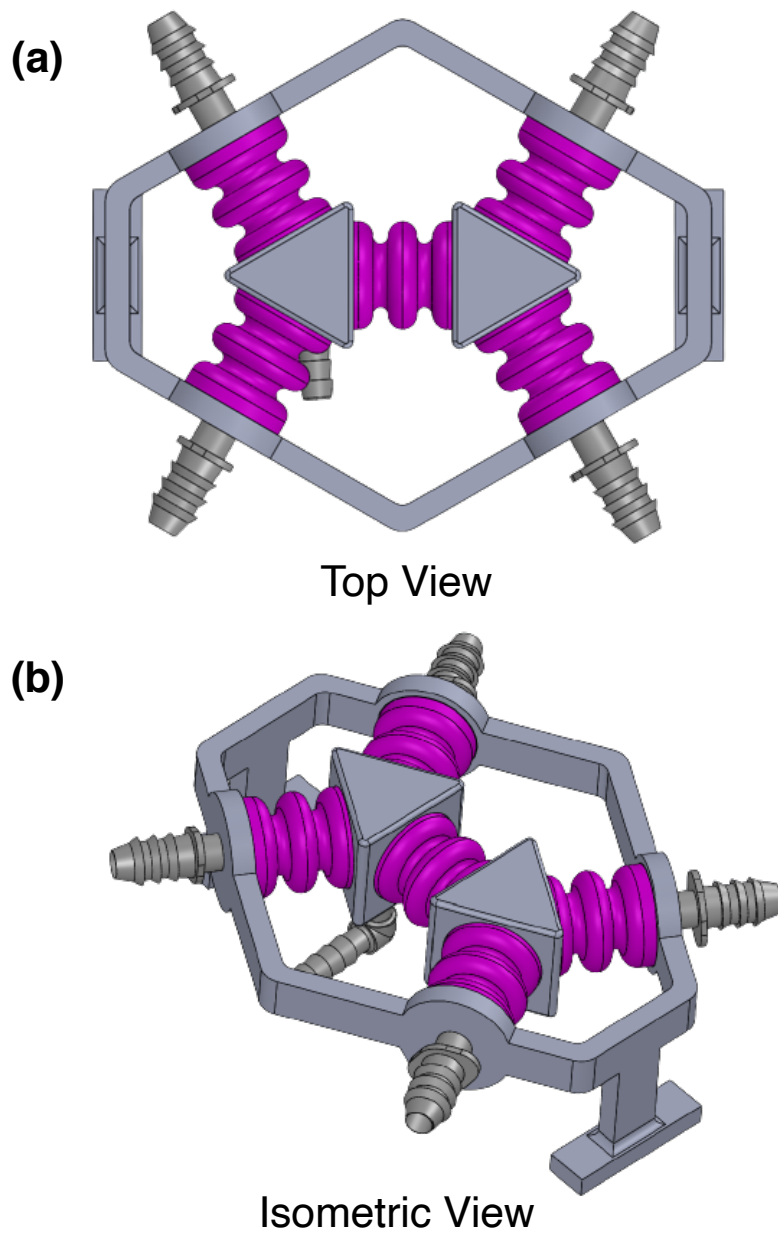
CAD model of the assembled floating actuator mechanism. (a) Top view showing the placement of the actuators and feedback heads in their resting state, and (b) Isometric view of the assembled floating actuator mechanism.
